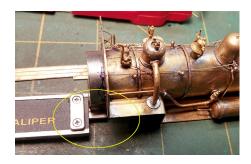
I needed to measure the distance from the cab front to the rear of the backhead and did so using the depth gauge of my caliper. I don't often use this feature
